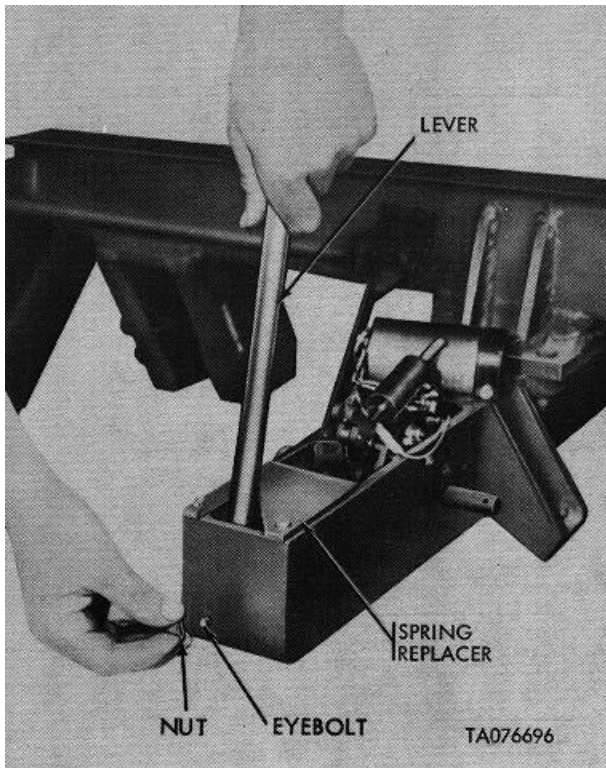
Hoisting Beam - Eyebolt Installation Using Spring Replacer Lever and Spring Replacer
